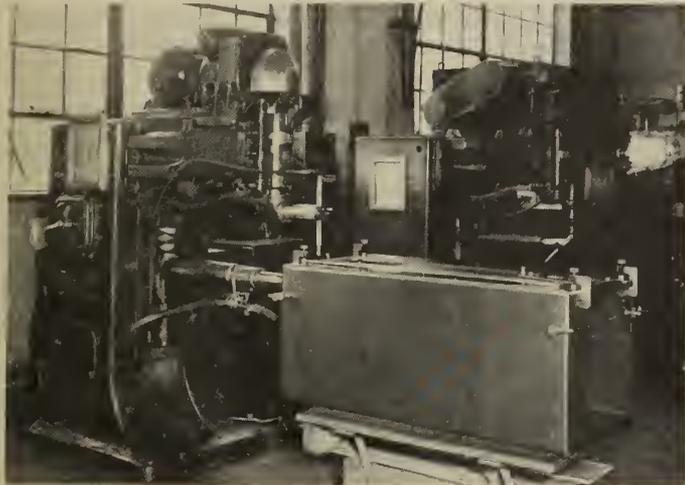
Modern Spot Welders used in the Production of All-Steel Refrigerator Cabinets.
